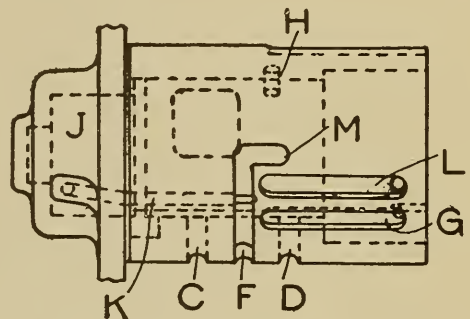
Main Valve Bushing of Westinghouse 9½-Inch Air-Pump.
